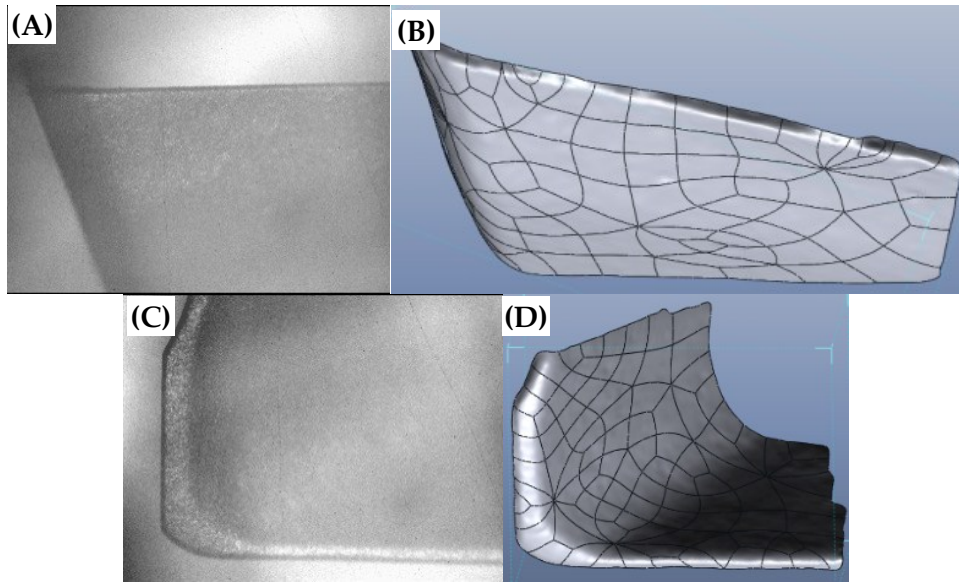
ISCAR IC-28: (A, B) Flank, (C, D) Rake faces
